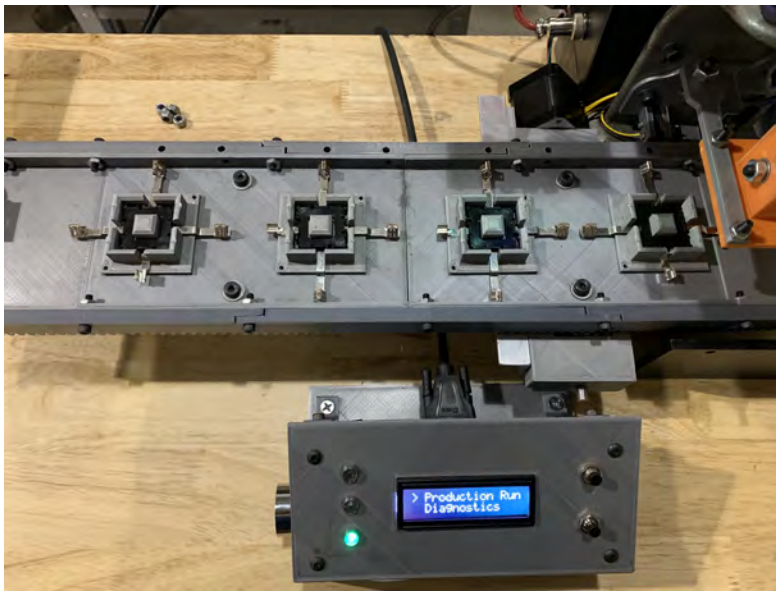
Overview of loading parts into the Automated Busbar Insulator Assembly.
